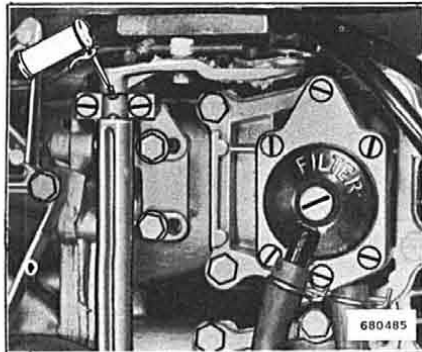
Throttle Shaft Bearing and Magneto Linkage
